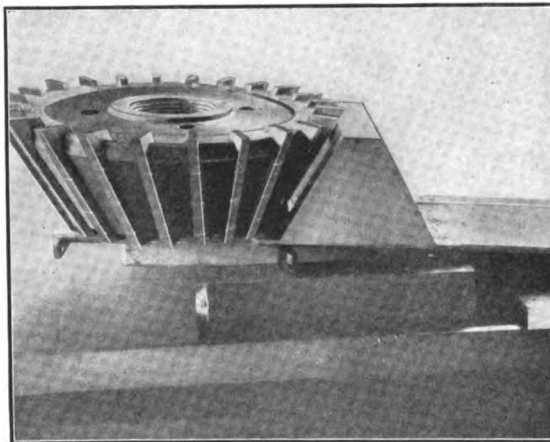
MILLING BEVEL ON RADIATOR TOP
